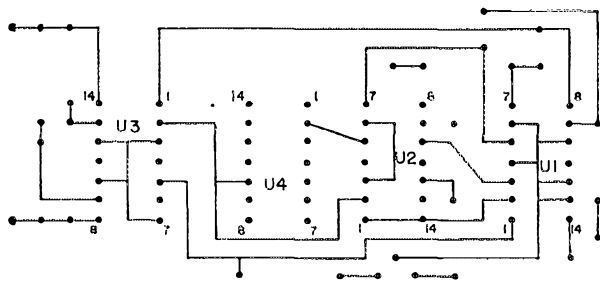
Printed-circuit layout for solder side of board. Scale is actual size.
